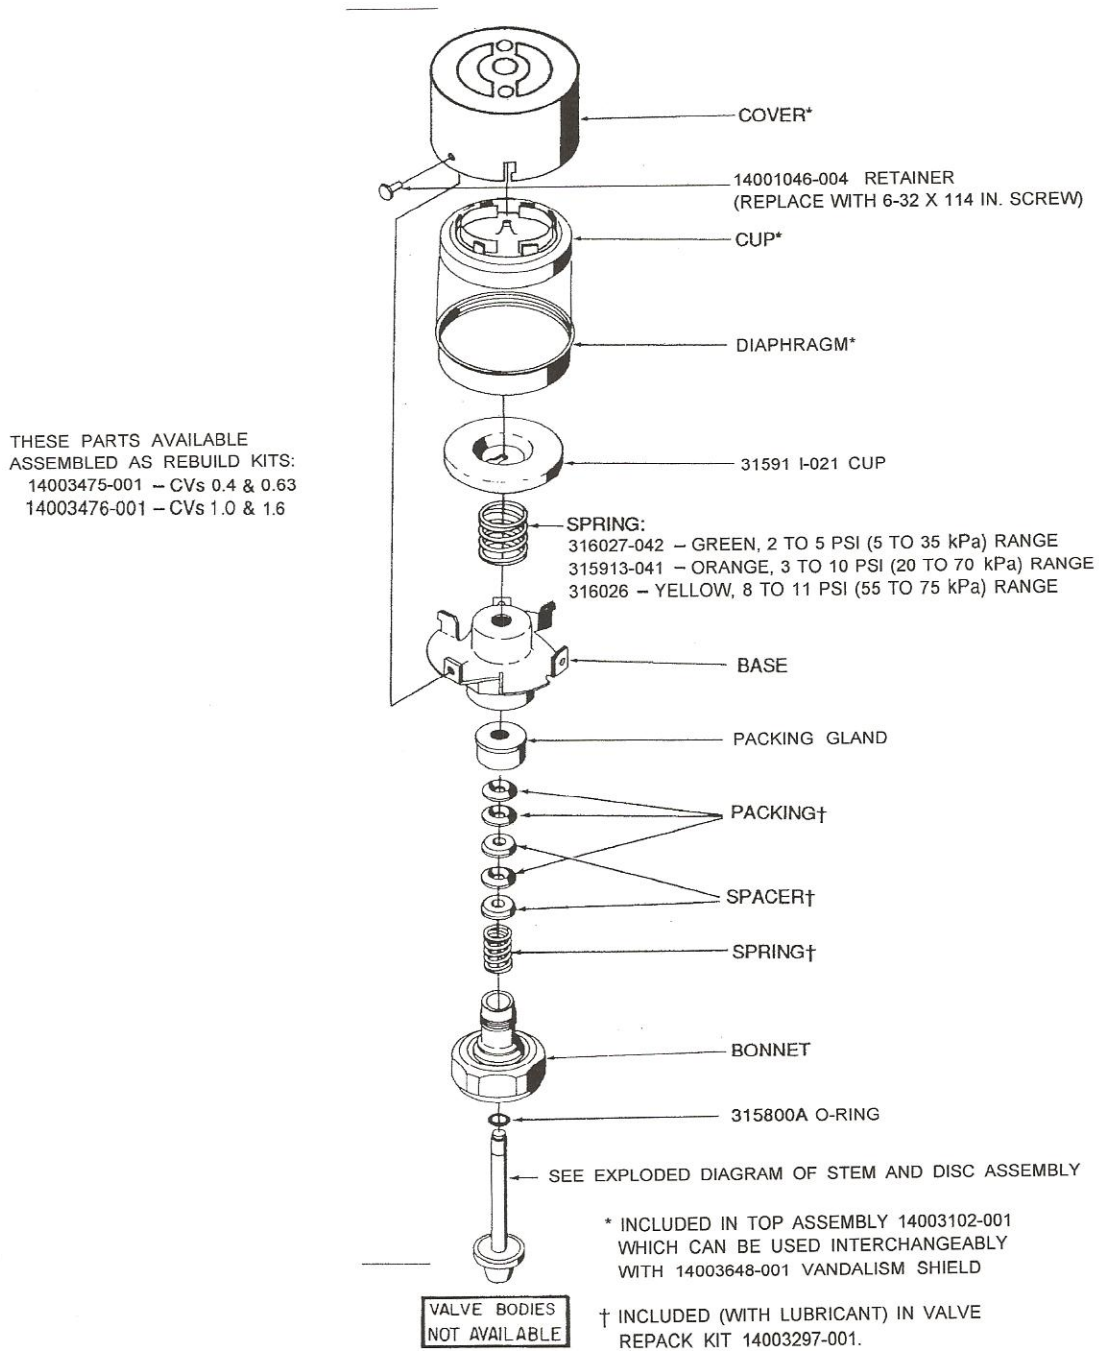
Exploded Diagram of VP527A Valves, Series 4.
